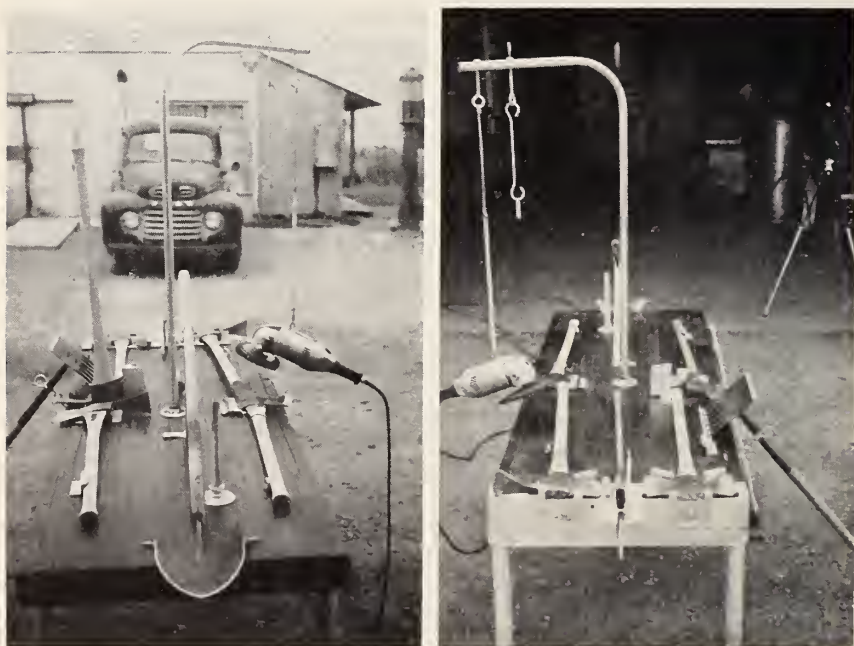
Tool grinding table: *Left*, Tools in position for grinding; *Right*, jigs for holding tools from which handles are to be removed.
